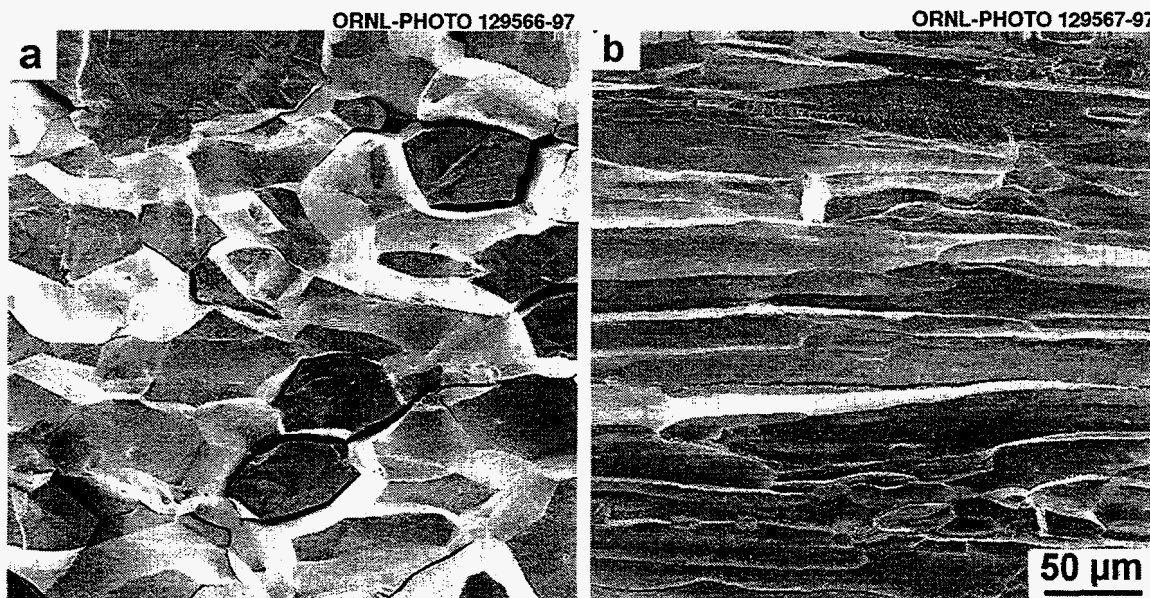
Scanning electron micrographs of the fracture surfaces of welded new-process DOP-26 impact tested at (a) 900 (fractured in base metal) and (b) 980°C (fractured in weld centerline).
